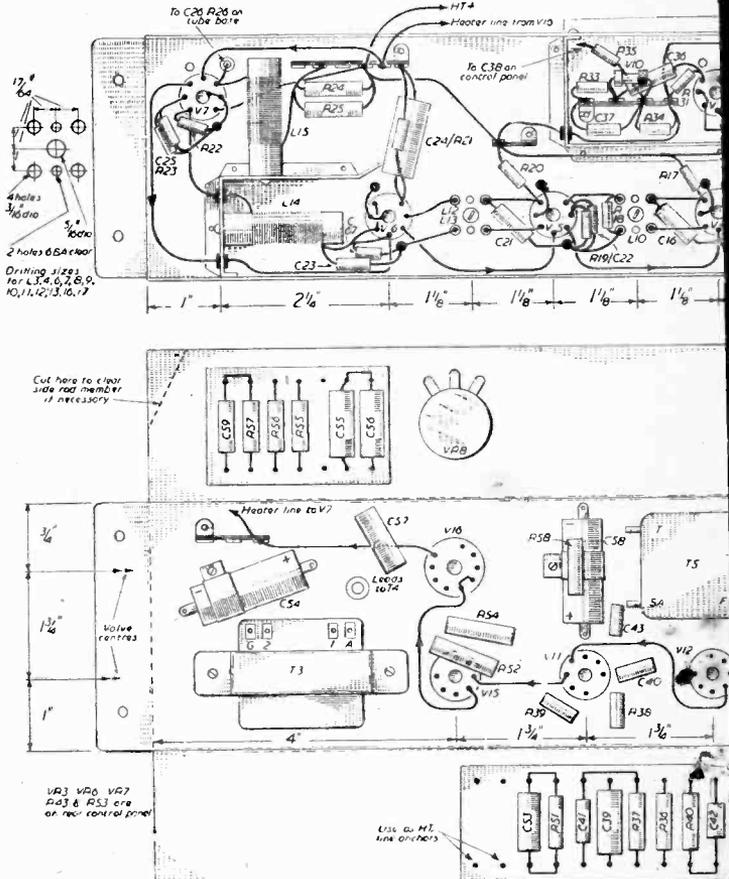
(top).—Layout of the vision-sound strip, with wiring.
